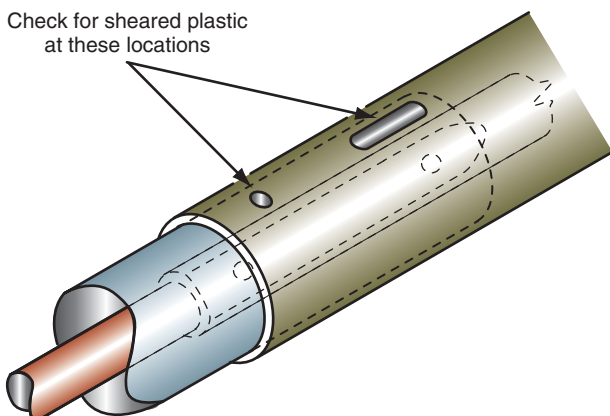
Inspecting for sheared plastic in jacket openings.
